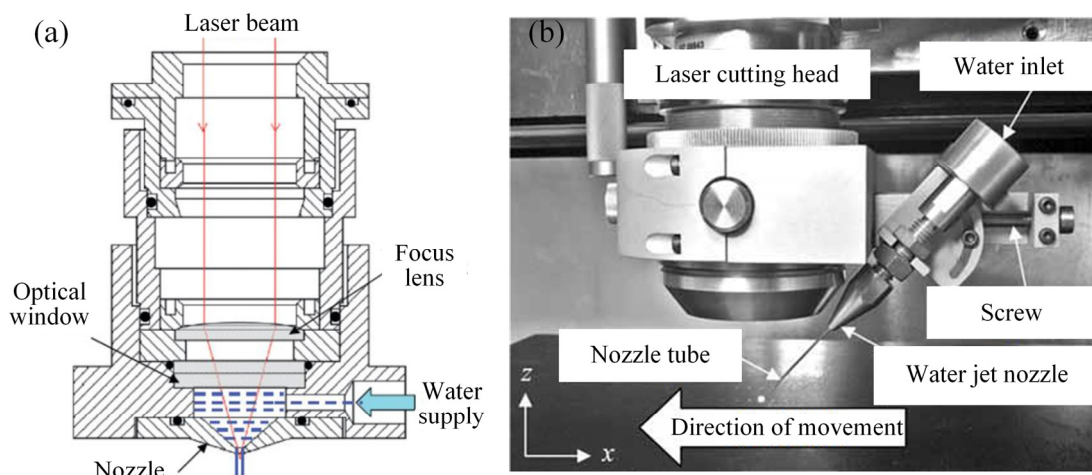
Schematic of Water-Jet Assisted Laser Machining Device[16]: (a) Coaxial water jet; (b) Paraxial water jet
